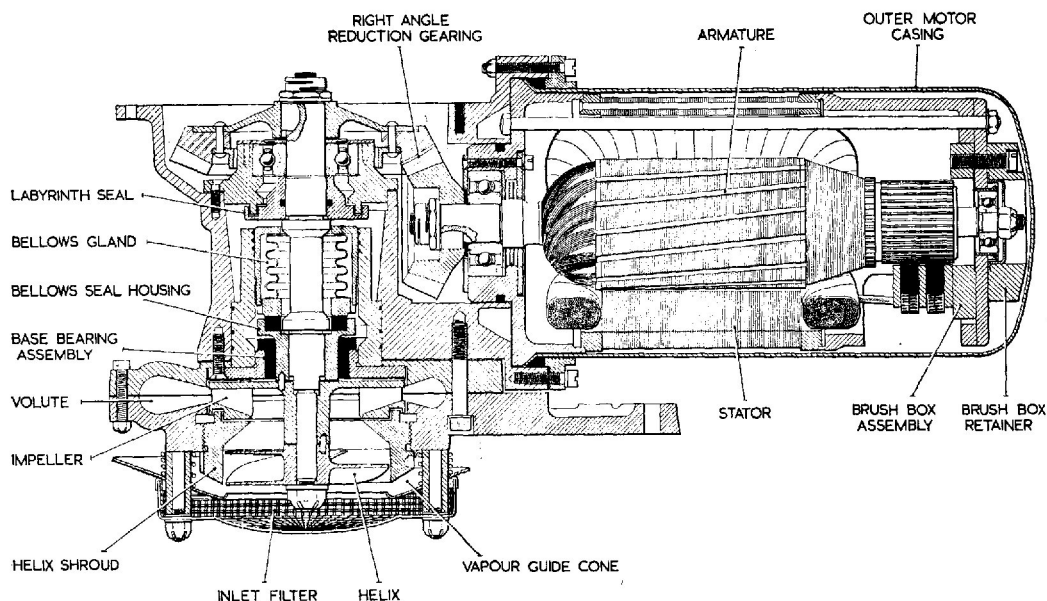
Typical SPE.800 and SPE.1200 series pump and motor unit assembly
